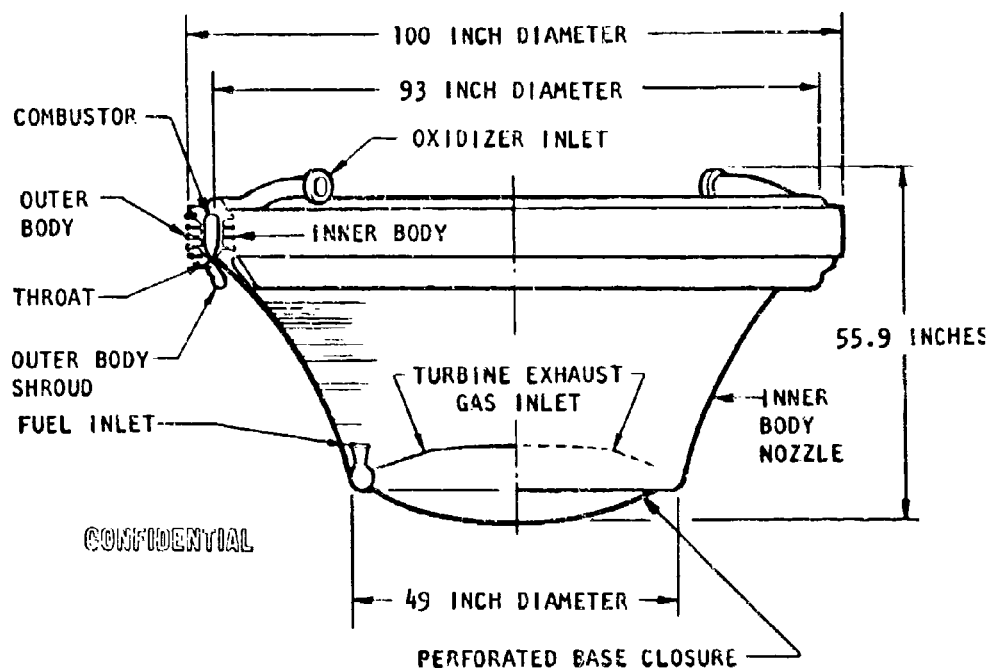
Demonstrator Engine Thrust Chamber Assembly
